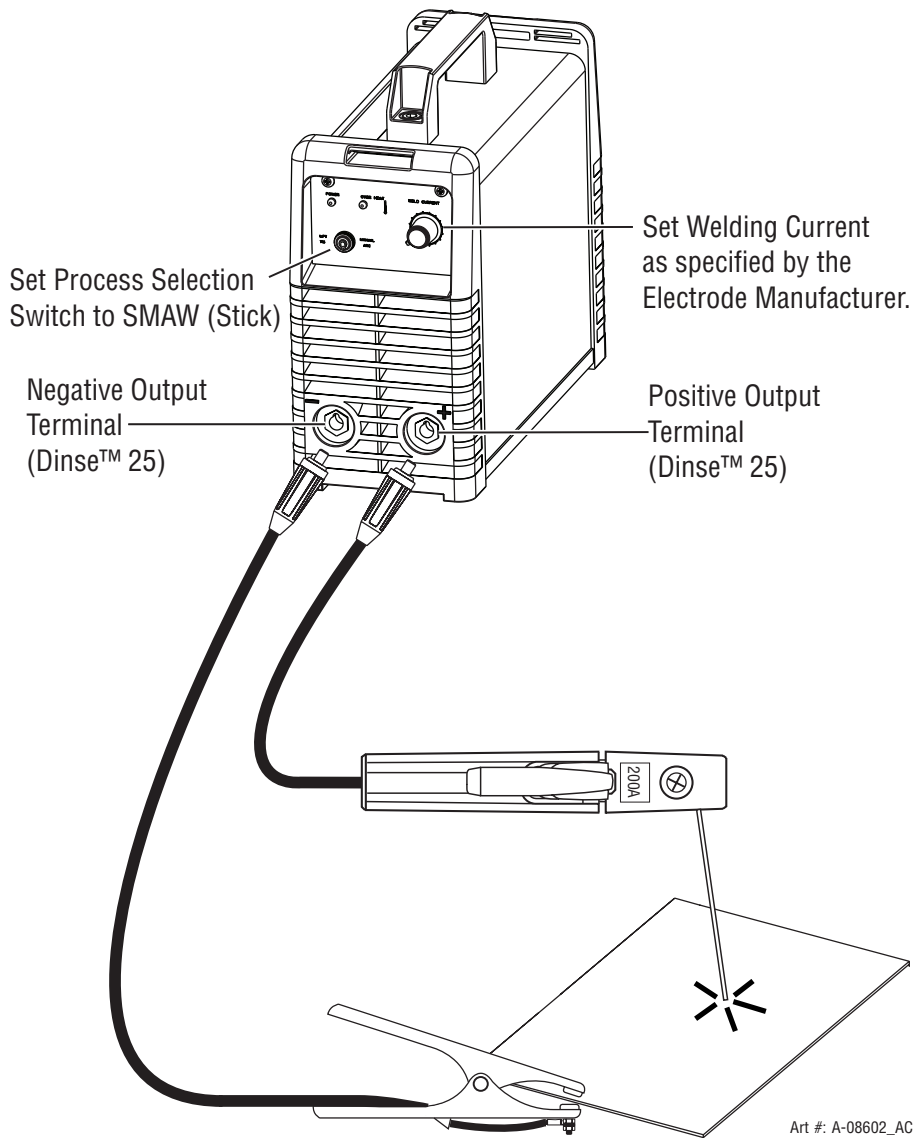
Setup for SMAW (Stick) Welding
